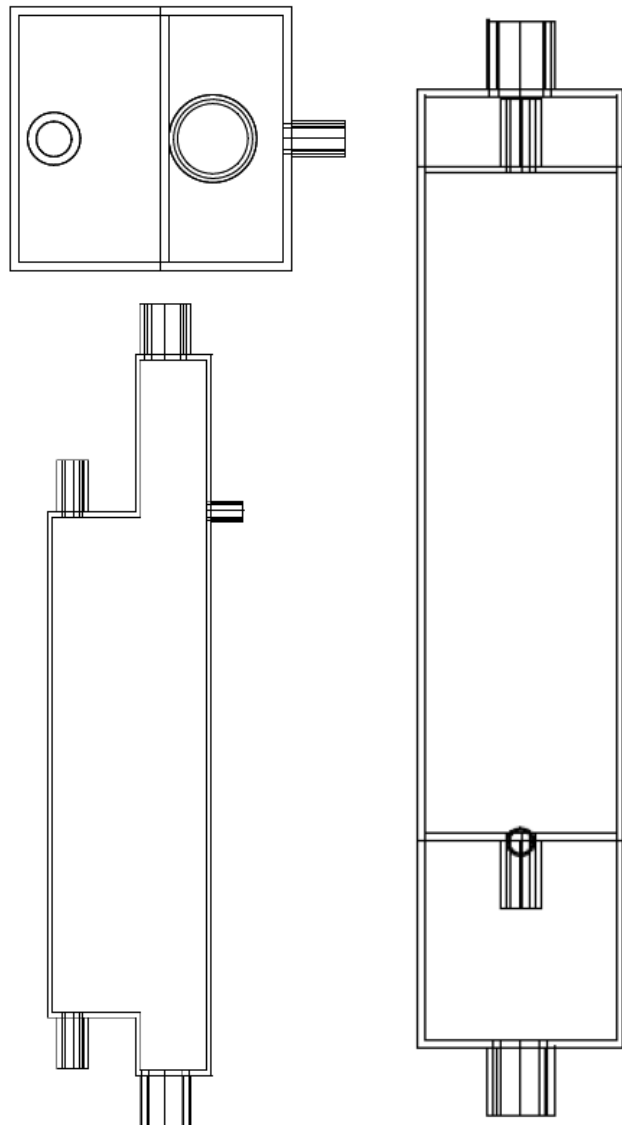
Test section planes of the first design without proportions in DWG TrueView 2016 ®: a) Plant, b) Profile, c) Elevation.
